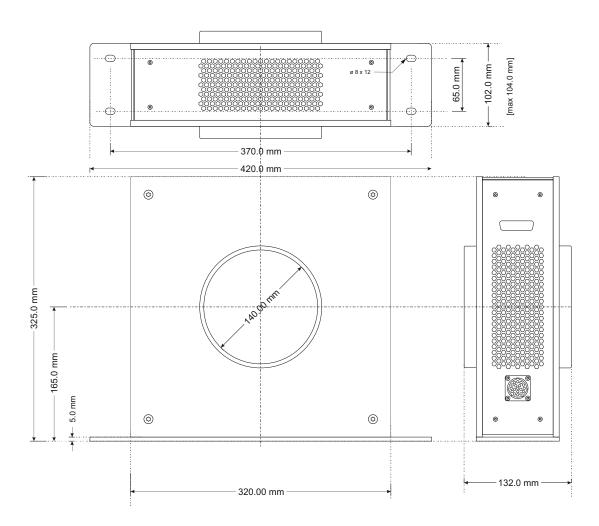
Dimensions of transducer head. 0.3 mm Tolerance
